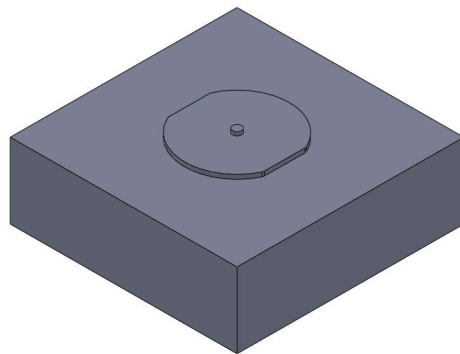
shows the nylon pieces which have about 65mm diameter and only 8mm thickness. There are some offset from the exact values because the fabrication process may need some work piece surface finishing. Figure 8 shows the Polyethylene (PE) block that will be used as the holder of the nylon pieces for machining. Nylon material is harder than PE and quite suitable to secure the piezoelectric part during the harvesting happen.
